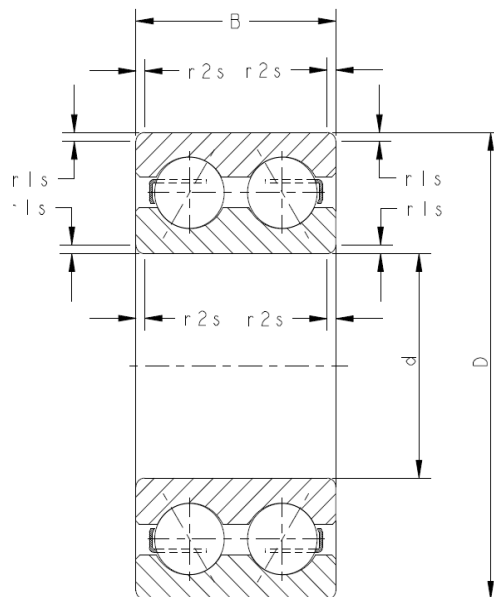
VARIANTS OF DOUBLE ROW ANGULAR CONTACT BALL BEARINGS
